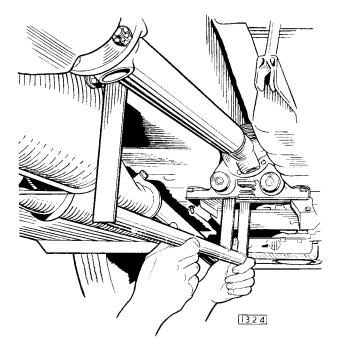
Checking the alignment of the front and rear propeller shafts.
